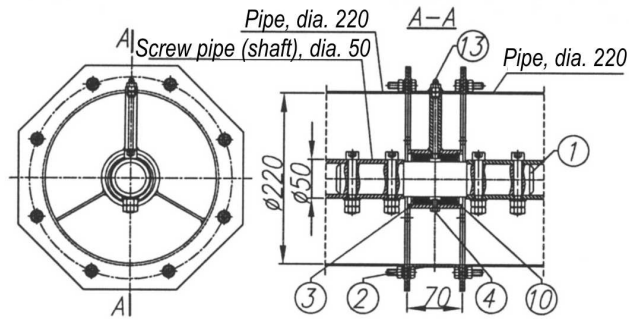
PS220-LOZ/P1- screw conveyor  $\varnothing\varnothing 220$  – polyamide intermediate bearing
